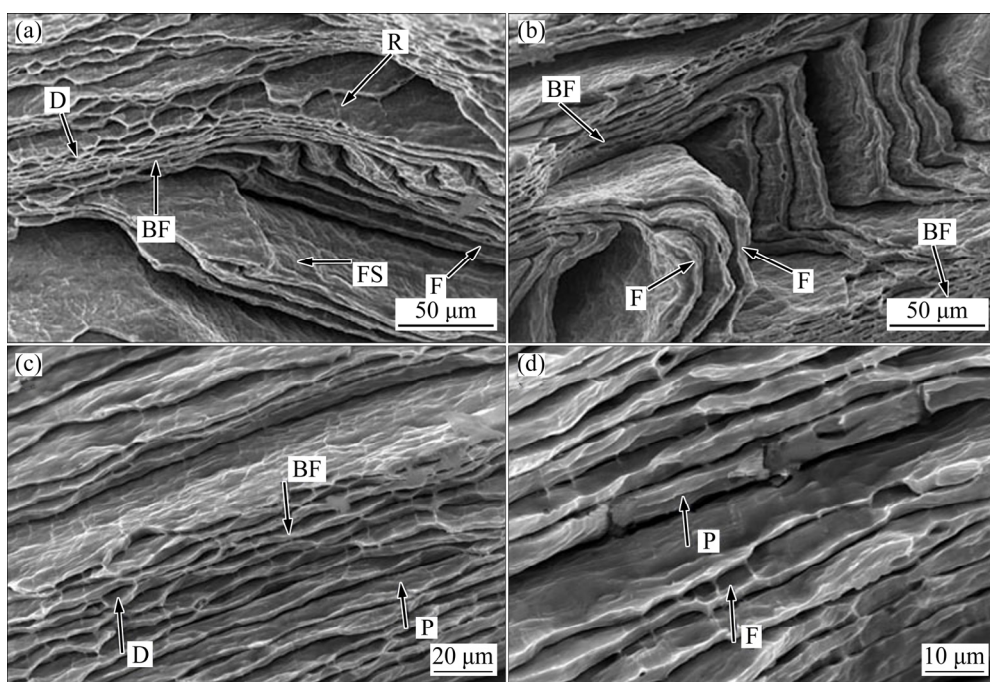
SEM images of A composite fracture surfaces after three-point flexural tests (D—Dimples; R—River markings; BF—Bundle of foils; F—Single foil; FS—Foil surface; P—Plate-like particles)
